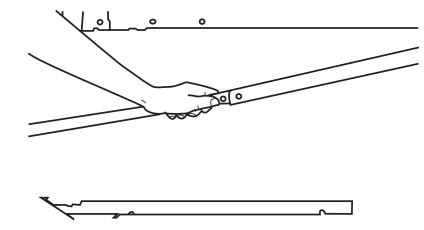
ATTACHING PULL TUBE END TO HEAD DRIVE ARM
